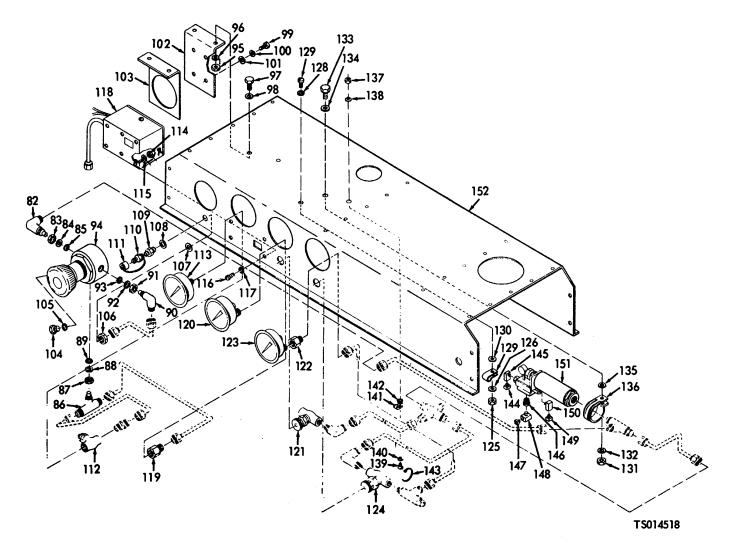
Roof Assembly (Sheet 2 of 2)
